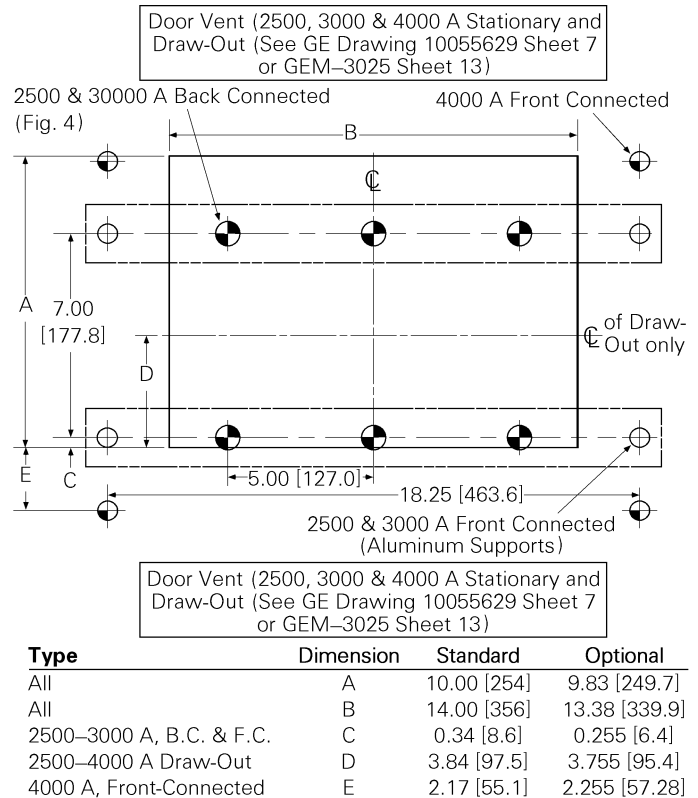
Locations of the front-panel escutcheon cutout and mounting plate, 2500–4000 A frames.
